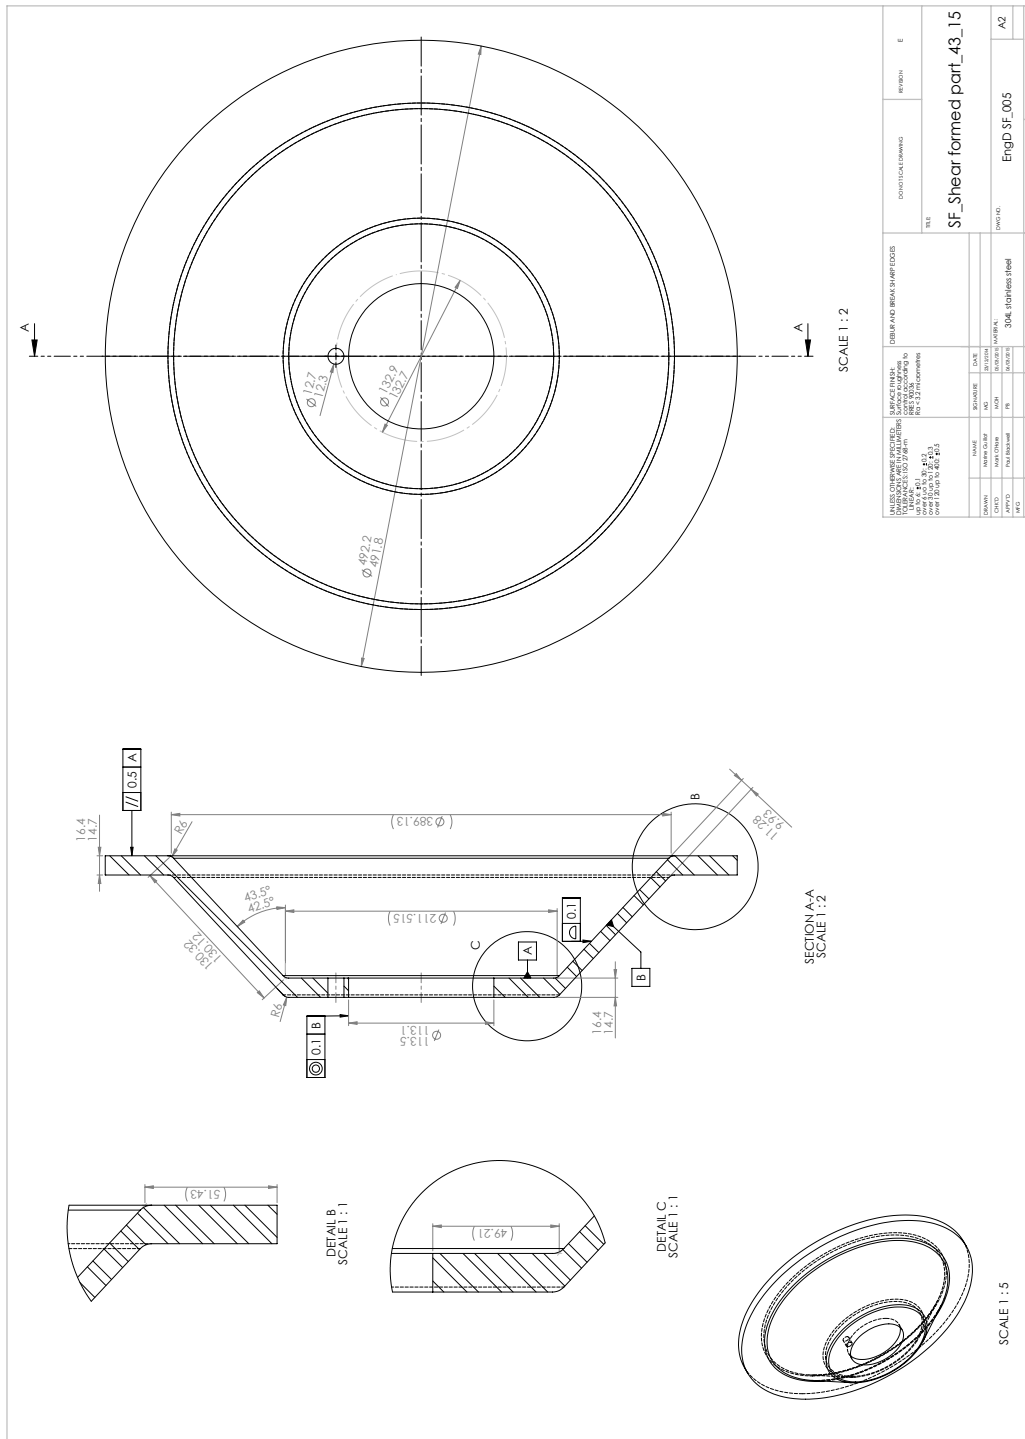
Drawing: Shear formed part – 43°, 15 mm thick, EngD – EngD SF\_005, “SF\_Shear formed part\_43\_15”.
